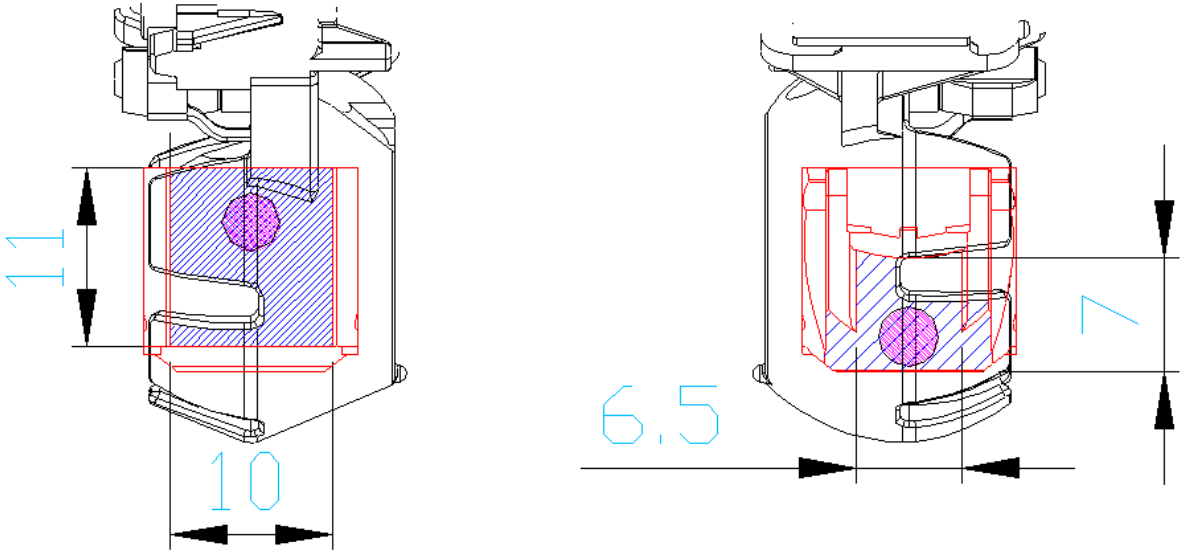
Intersection of overlap sensor surface and sensor boards suitable for welding
